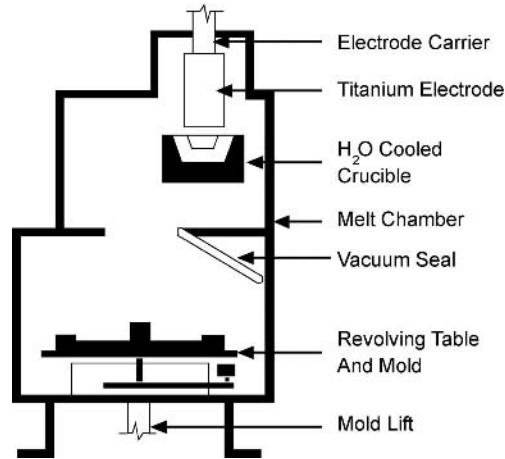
Schematic of a vacuum casting furnace used for making titanium castings (courtesy N. E. Paton, Howmet)
